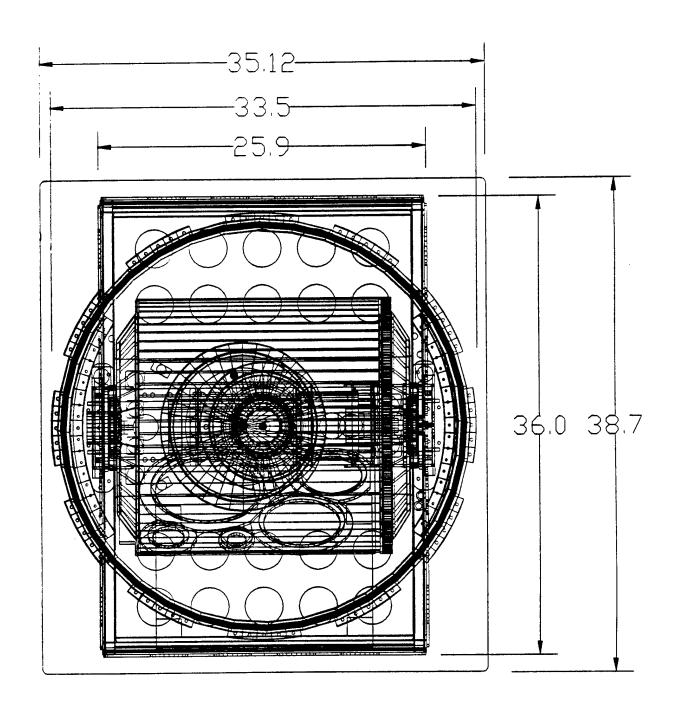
PSR AutocadTM rendering showing critical dimensions (in inches) - top view.
